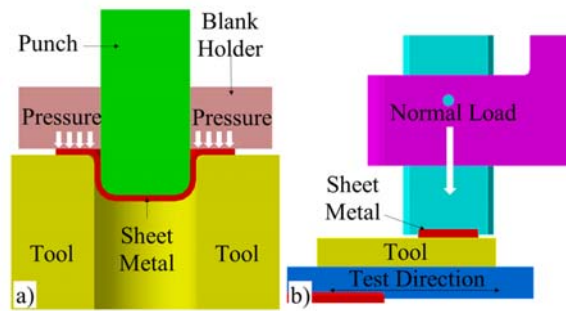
Figure A. The sheet metal under pressure in the deep drawing process a) the movement between the blank holder and the tool b) the simulation of the movement between the blank holder and the tool on the test device
